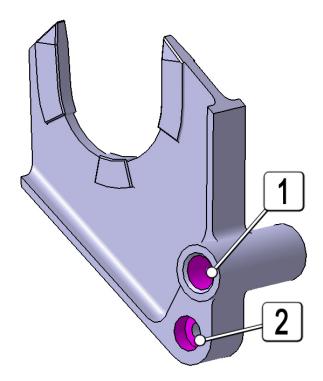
Selector fork of the shifting system 1 Axial guidance; 2 Mounting of the shifting rods
